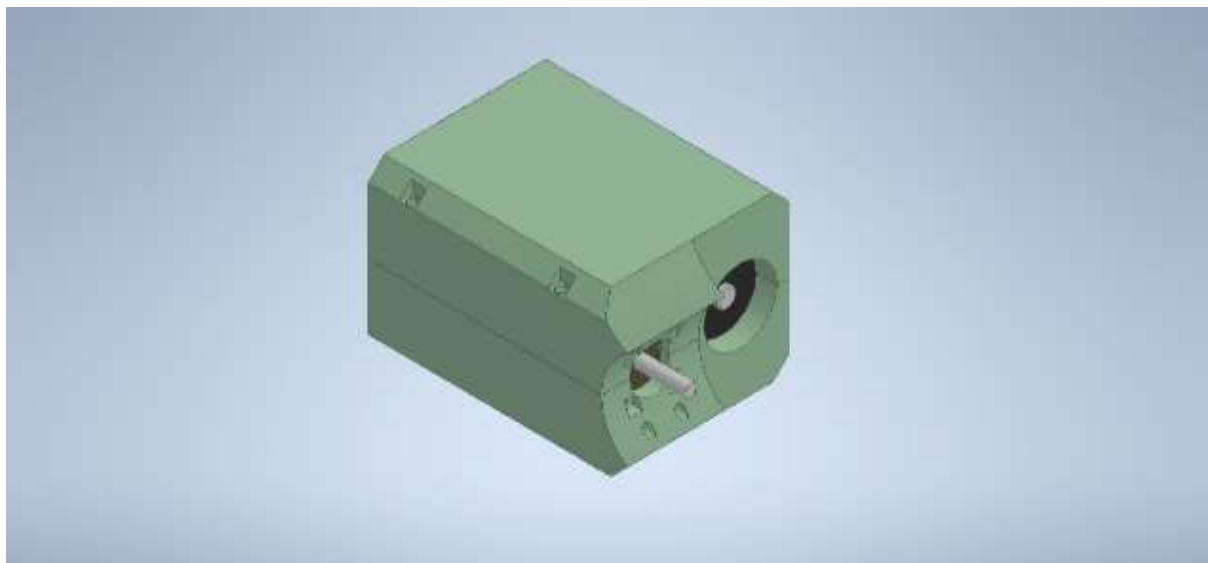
A picture of the whole segment assembly with placeholder DC motors in Autodesk Inventor
